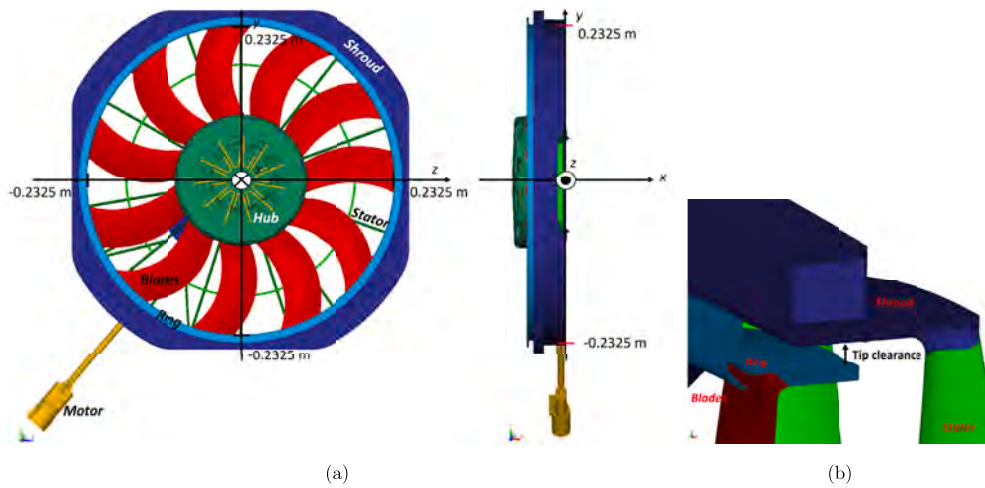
Tested automotive engine cooling module. The main parts in which the fan consists are shown with different colors. (a): Cooling module. (b): Tip clearance detail.
